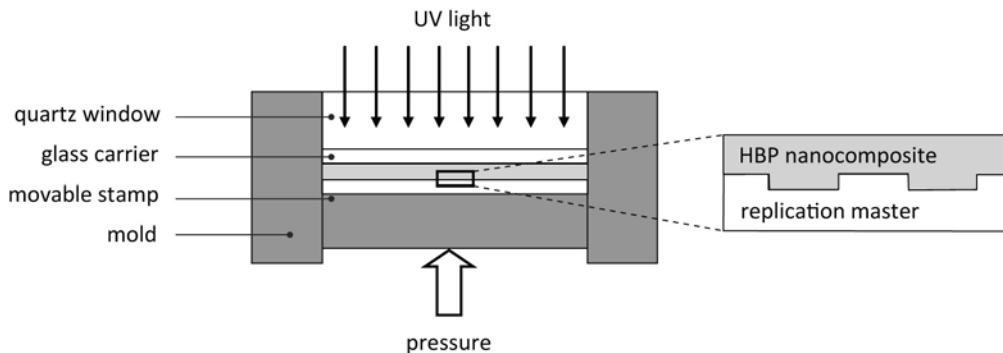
Schematic drawing of the UV-nanoimprint lithography tool.
